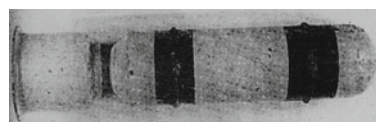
MBL welded pipe screw coupling for a hydraulic line
